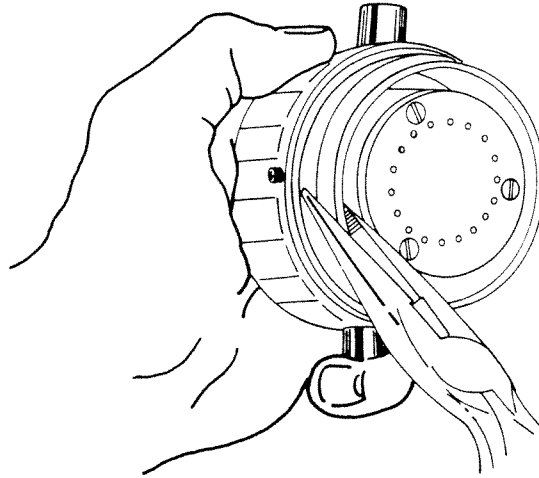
REMOVING EXTRUDED FERRULE FROM TOP END CAP
